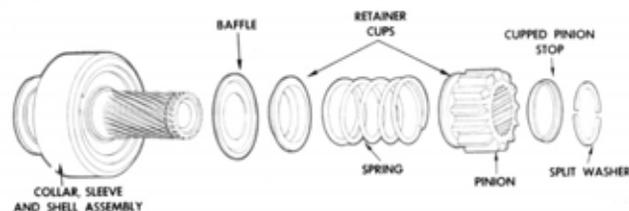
Disassembled view of late type heavy duty sprag clutch drive assembly.
